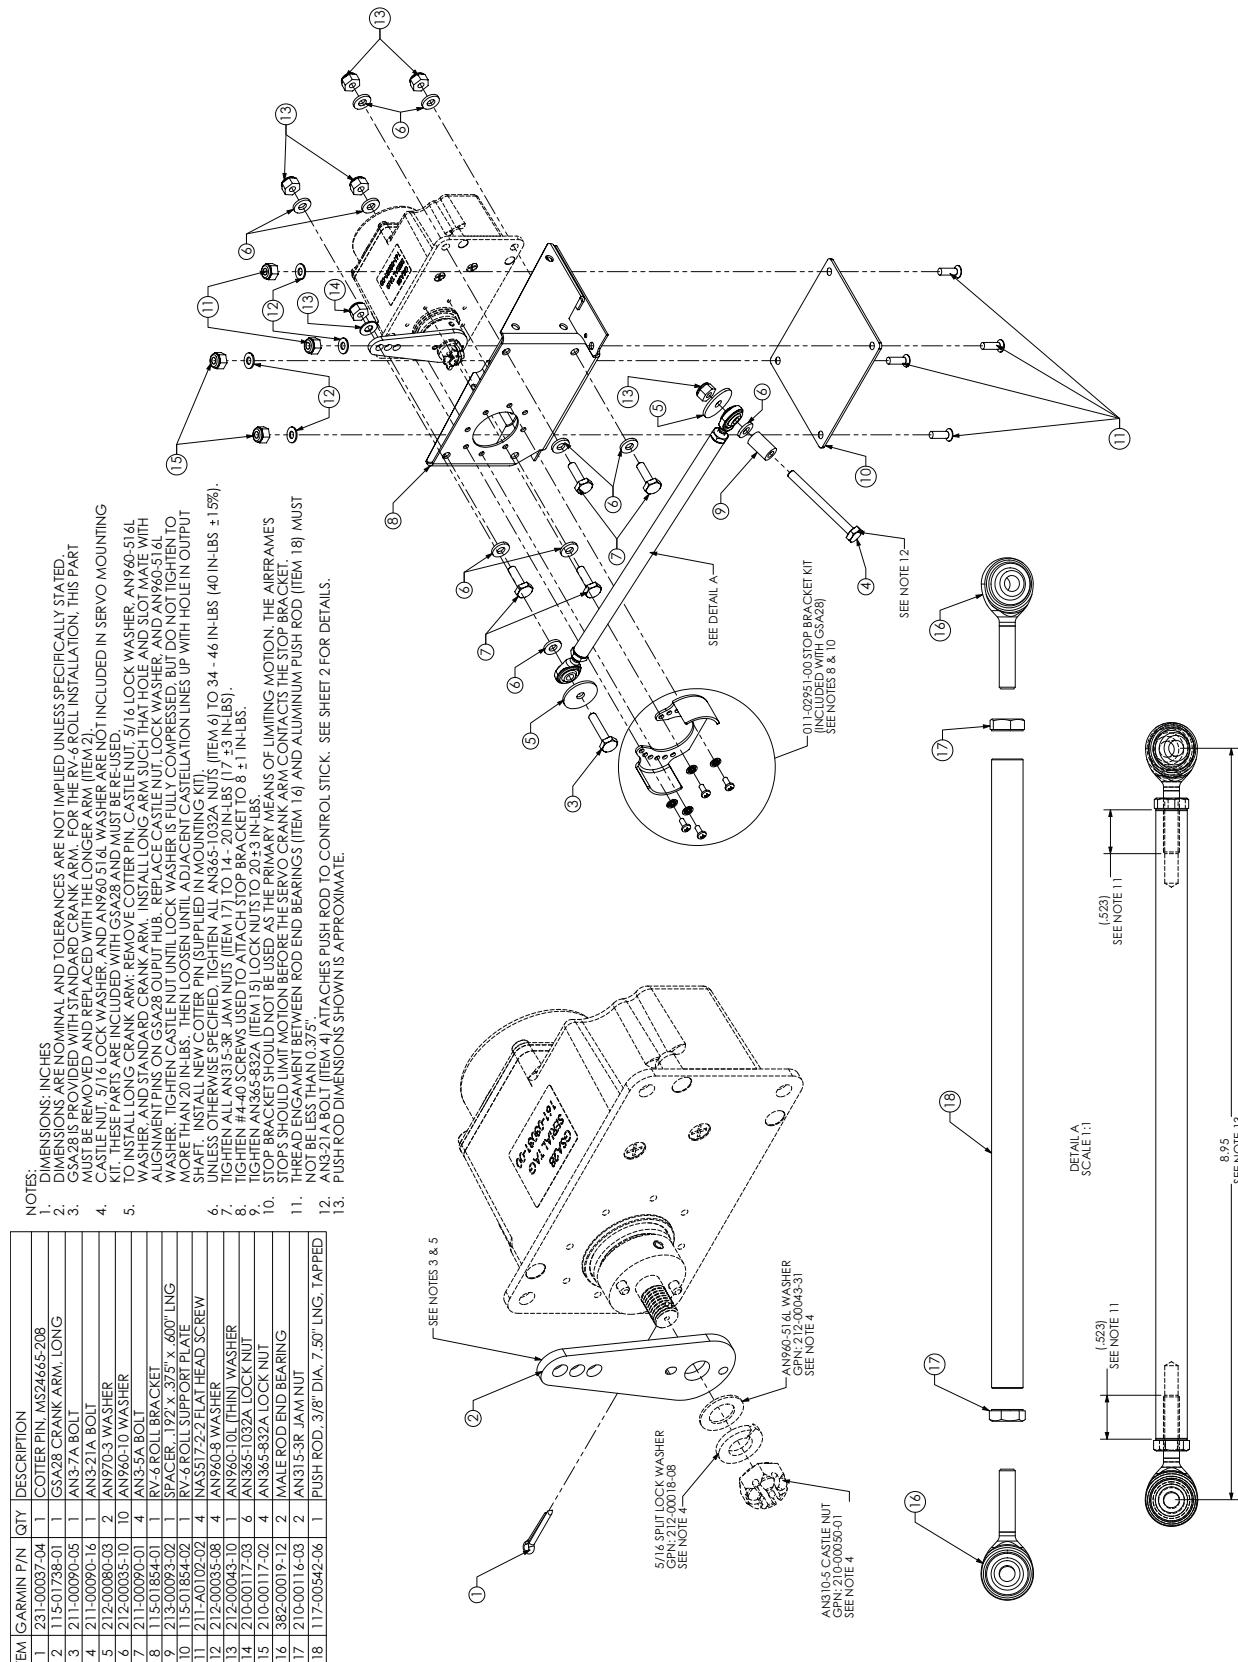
GSA 28 RV-6 Roll Mounting Kit 011-02952-10 (page 1 of 3)
